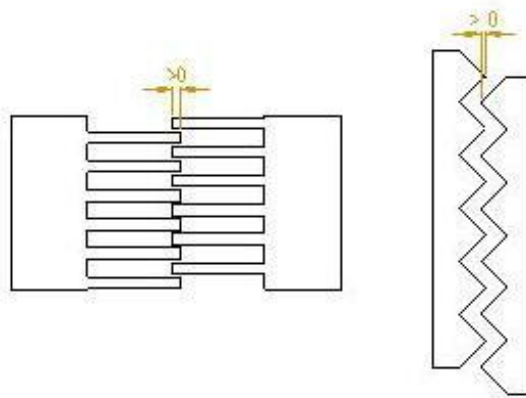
Rectangular and triangular cantilever minimum intersecting (dimensions in mm)
